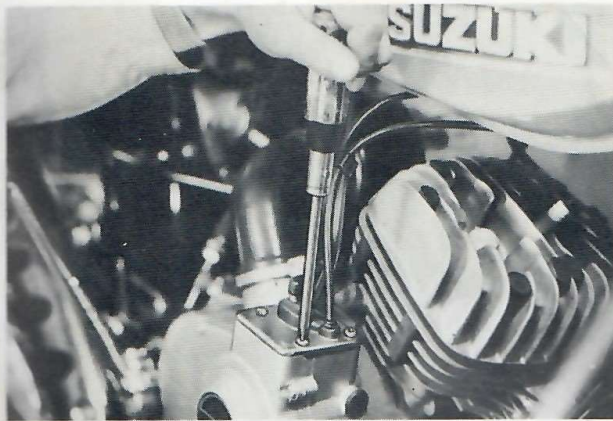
Unscrewing carburetor rubber cap screws
